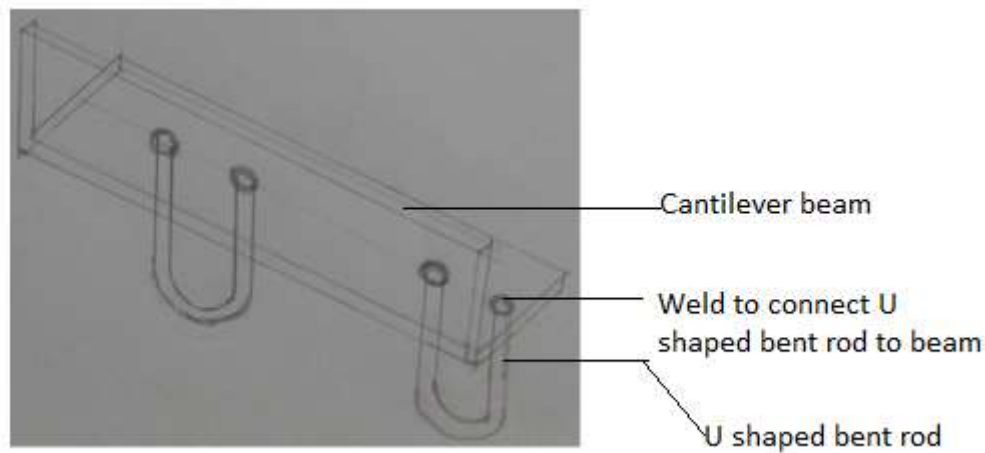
Weld joints at the bottom of the cantilever beam
